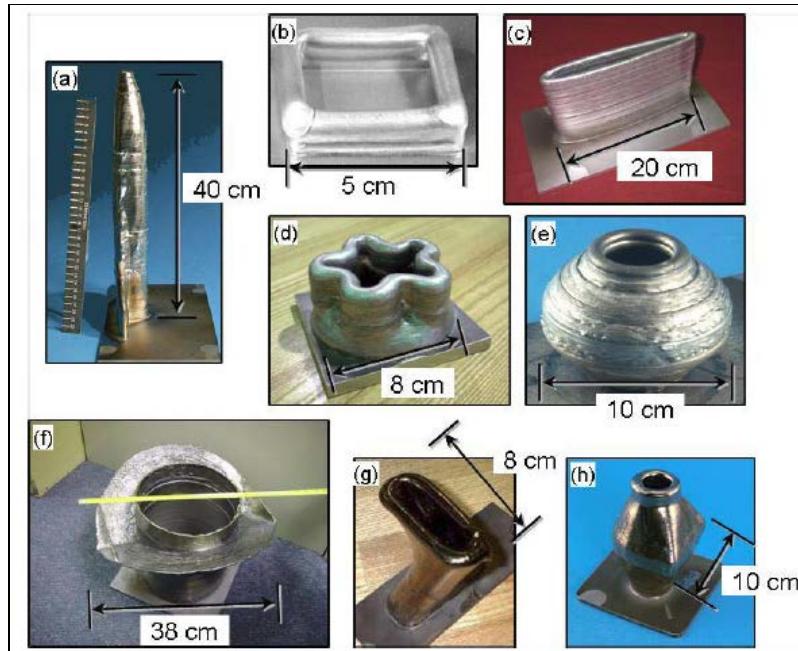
Examples of parts fabricated at NASA Langley using the EBF³ Process; (a) Ti-6-4 Wind Tunnel Model; (b) 2219 Al Square Box; (c) 2219 Al Airfoil; (d) 2219 Al Mixer Nozzle; (e) 2219 Al Converging Diverging Nozzle; (f) Ti-6-4 Guy Wire Fitting; (g) Ti-6-4 Inlet Duct; (h) Ti-6-4 Truss Node with flat attachment surface.
